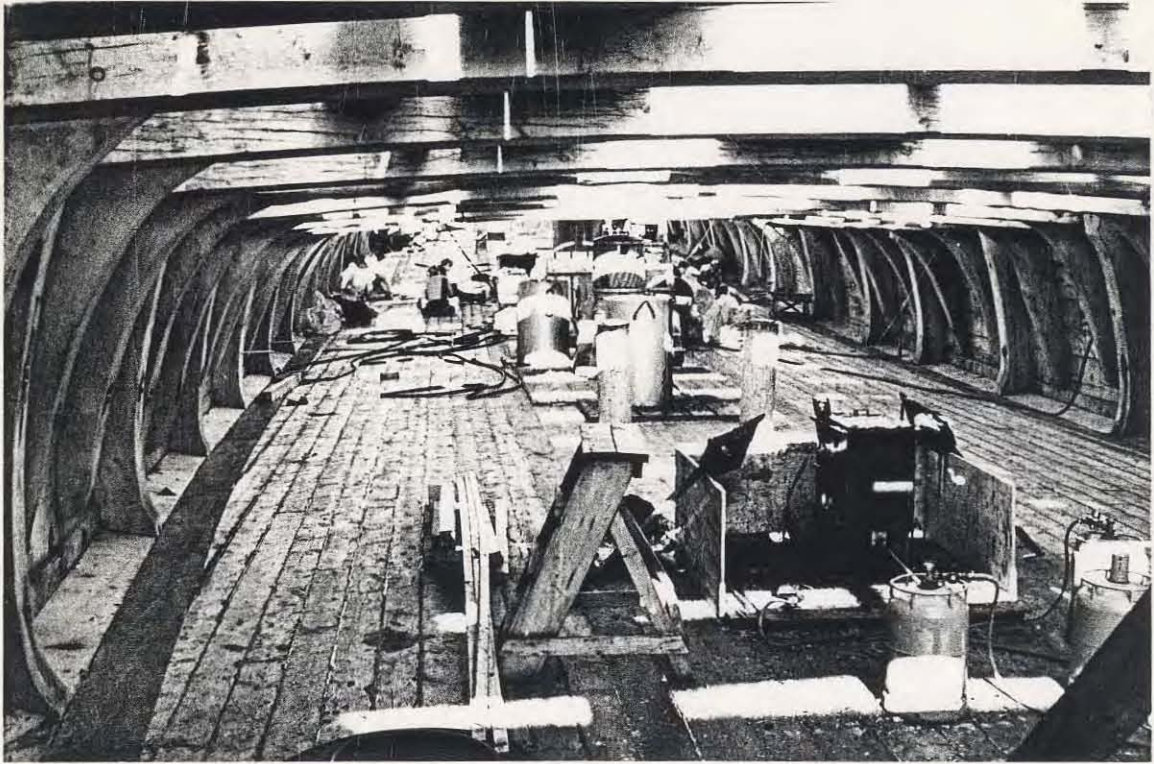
Caulking the gun deck of the *New Batavia*, Lelystad.
